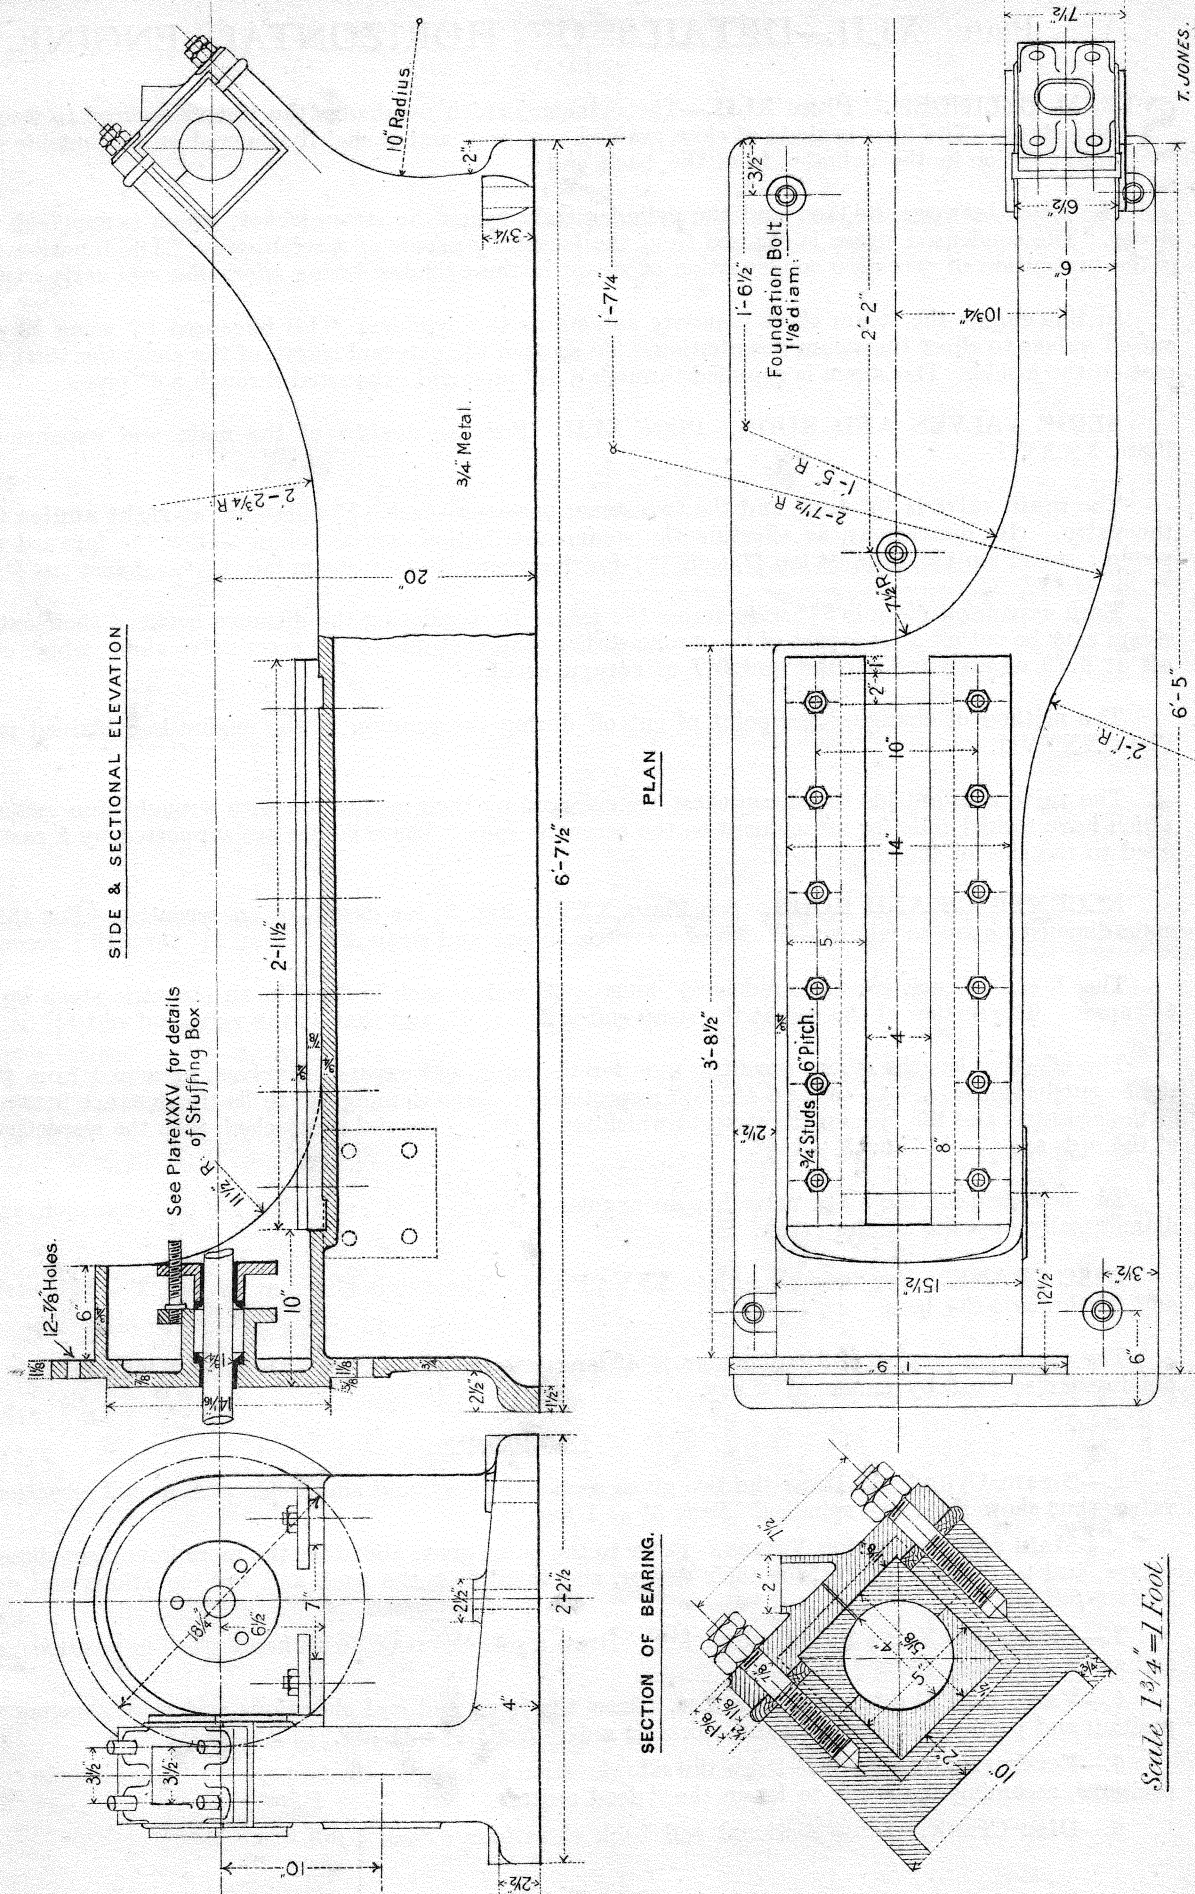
Plate XLII.—DETAILS OF HORIZONTAL ENGINE.
